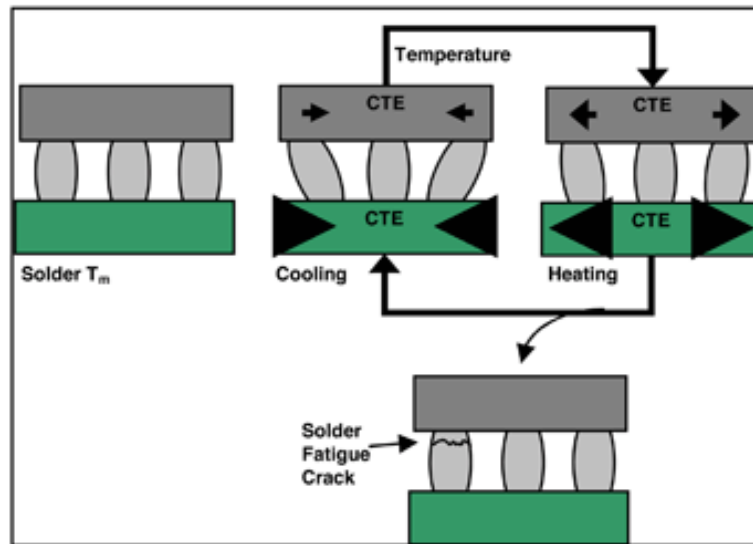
Stress on the solder joints during heating or cooling of the package [13].
